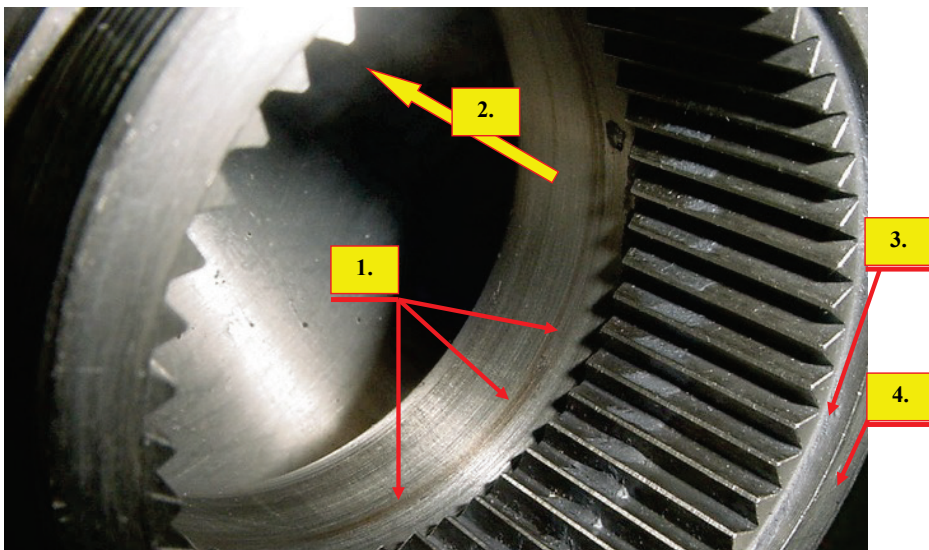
Overheating traces inside the turbojet engine central support rolling bearing journal: 1 – discolouration ring (yellow tarnish), 2 – flight direction, 3 – central bearing journal with internal spline for connection to the propulsion turbine shaft, 4 – internal bearing race
